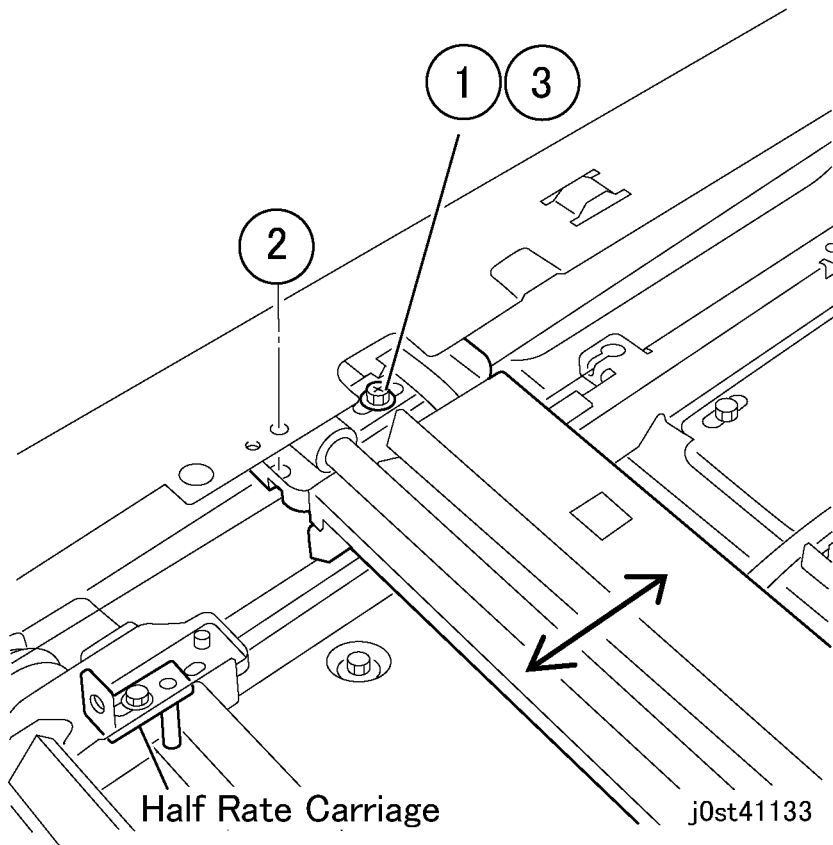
Position Adjustment of Full Rate Carriage 2/2
